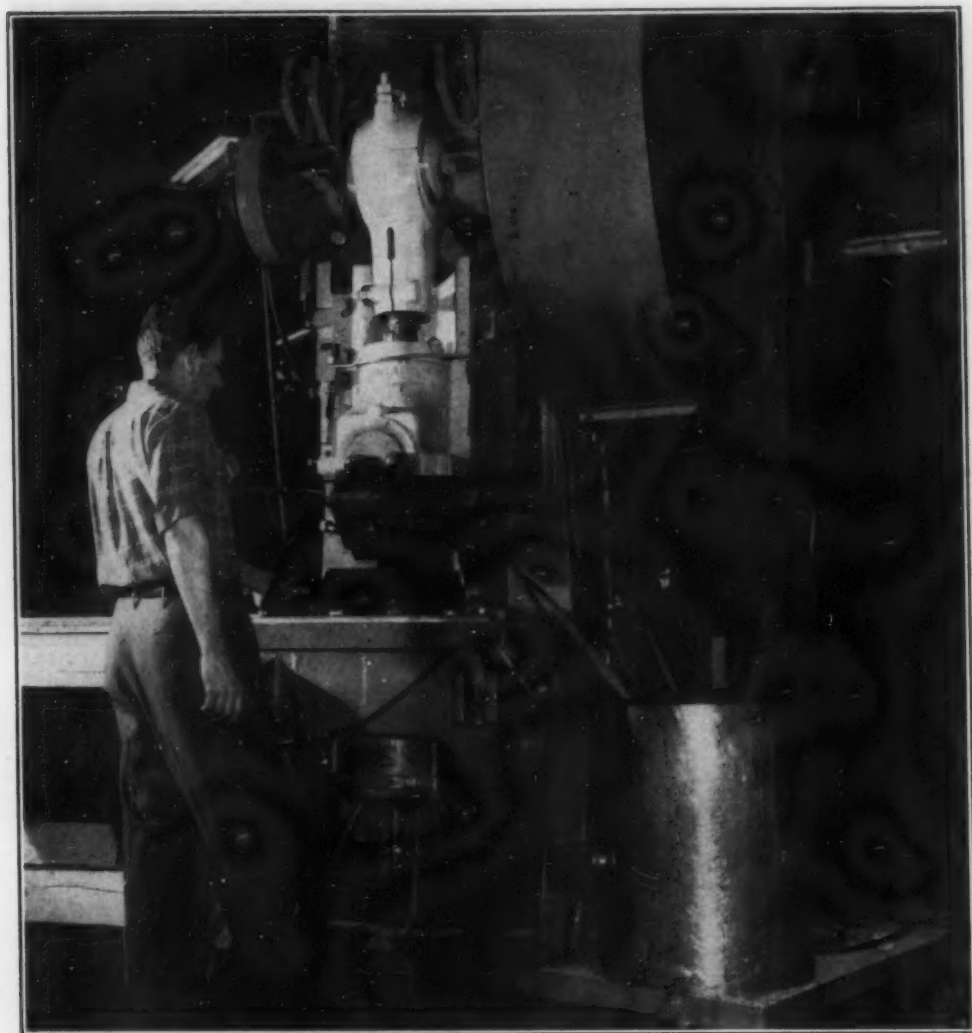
Punch Press Forming 75S-T6 Extrusions Preheated by Hot Oil Immersion Method.
